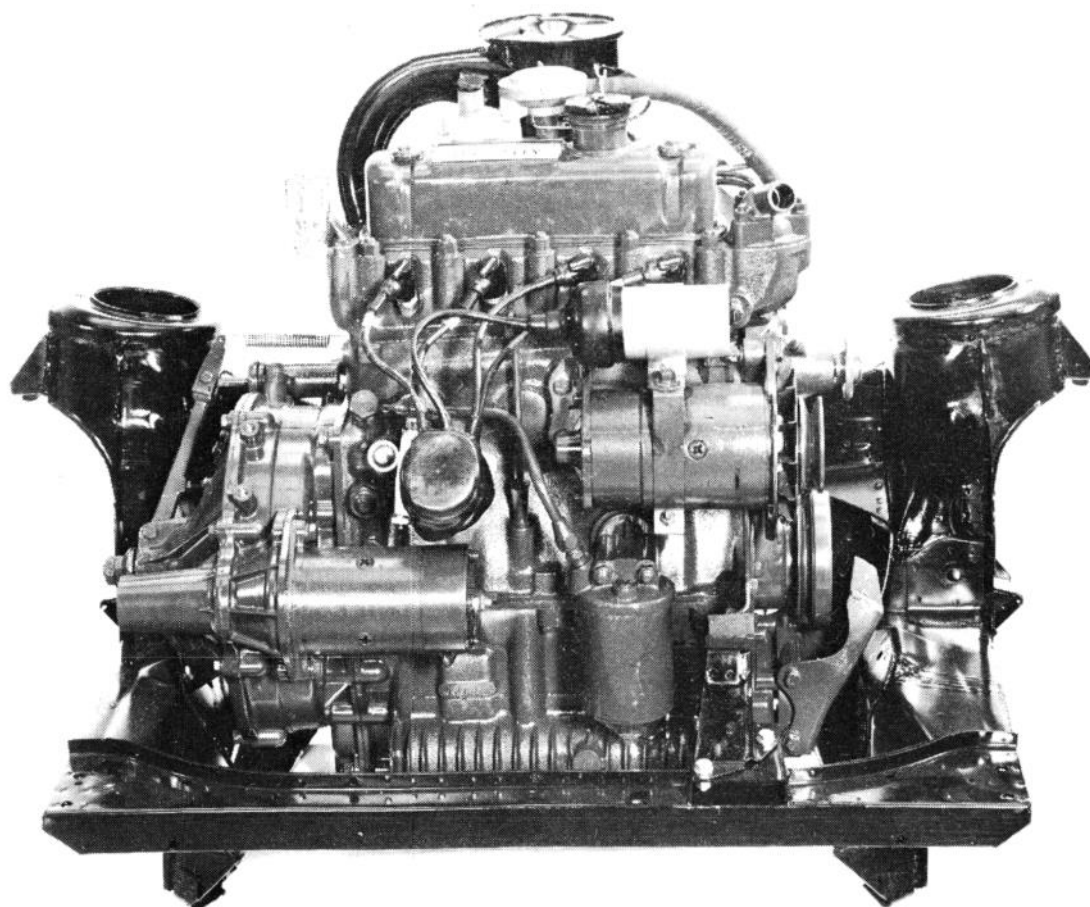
Typical power unit and sub-frame assembly (Wolseley 1100 shown).
